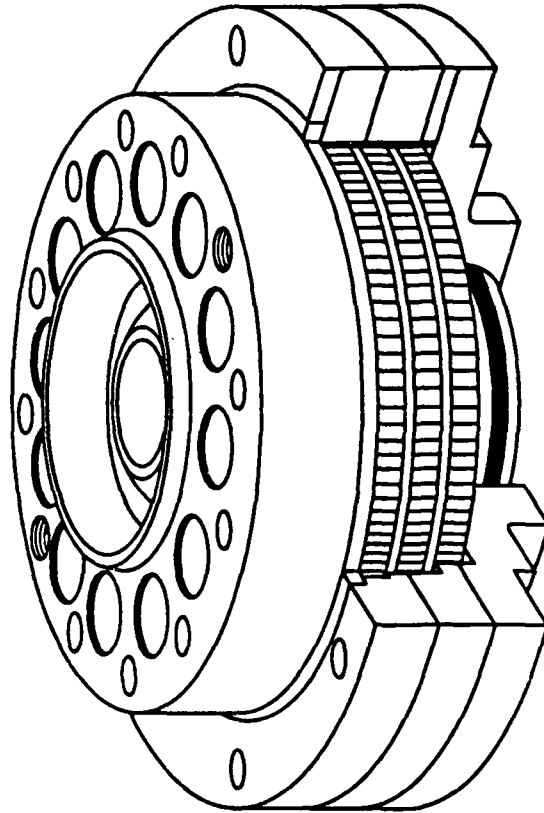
Cut-away view of FA Series SUMITOMO Servo-Match Cycloidal Reducers, showing epitrochoid disks, roller pins and output flange.
